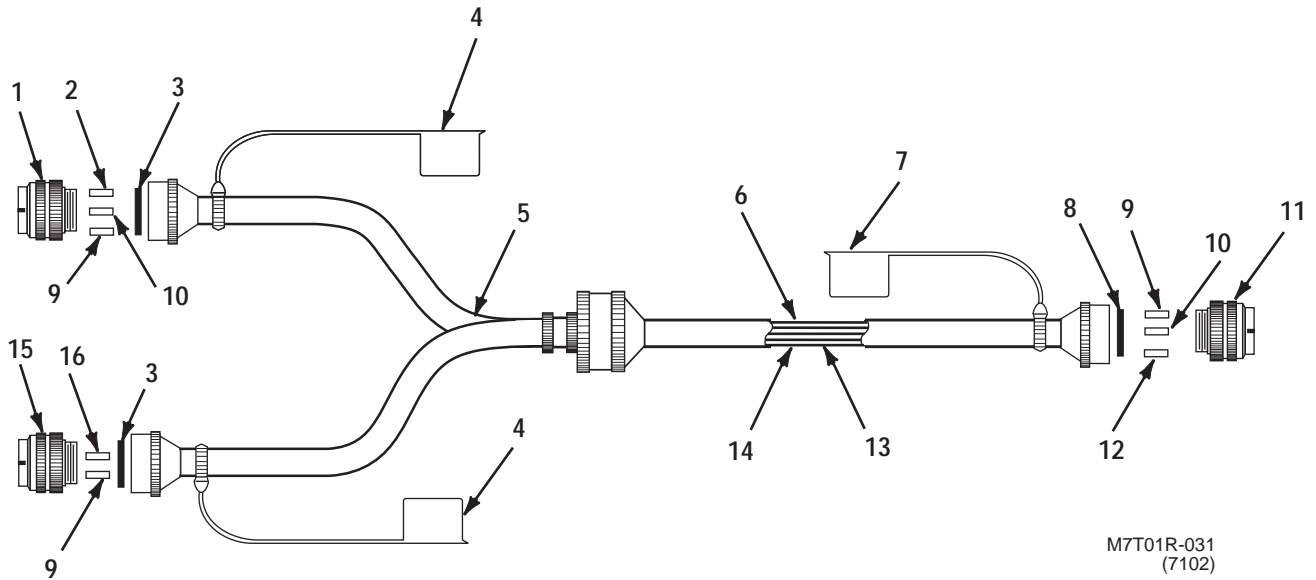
Group 96000304 Special Tools (Repair Parts) Transfer Standards Adapter Cable
